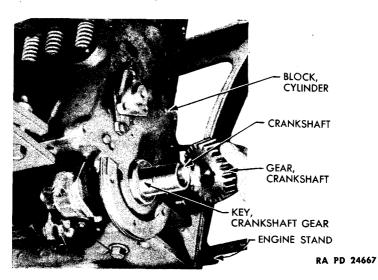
Crankshaft Gear And Key In Position For Installing Gear
